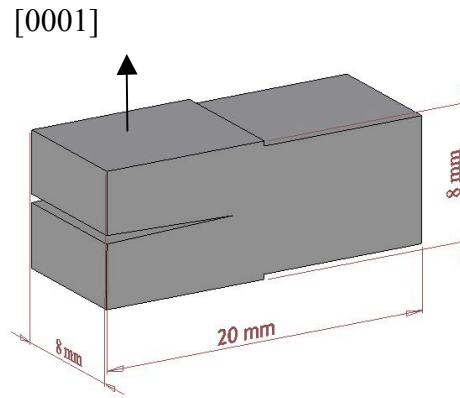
Schematic representation of the double cantilever sample geometry used for fracture testing.
